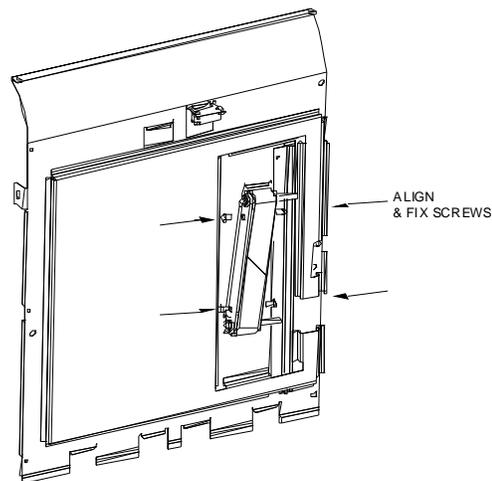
Aligning and Tightening Paper Guide Assembly Into the Machine.
